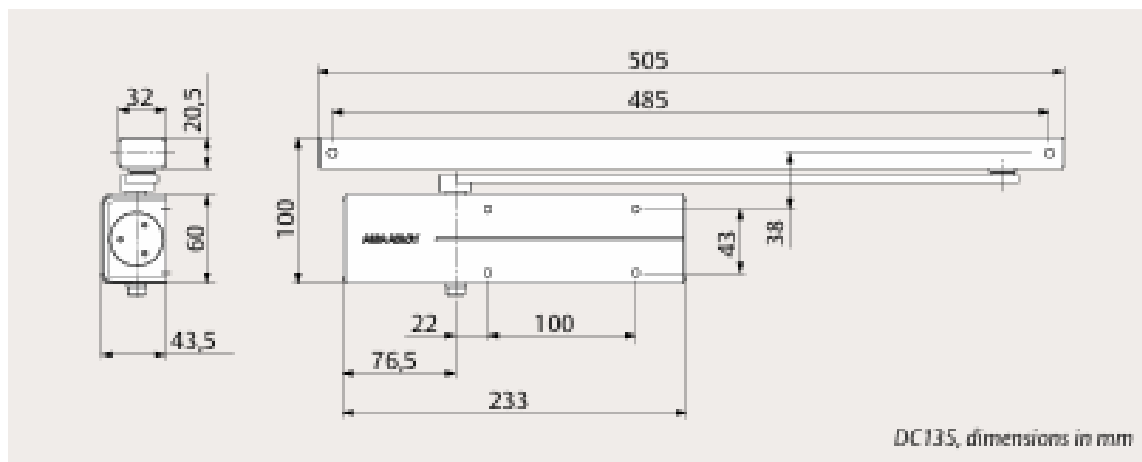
Manufacturer drawing of item 11 Door Closer 1
